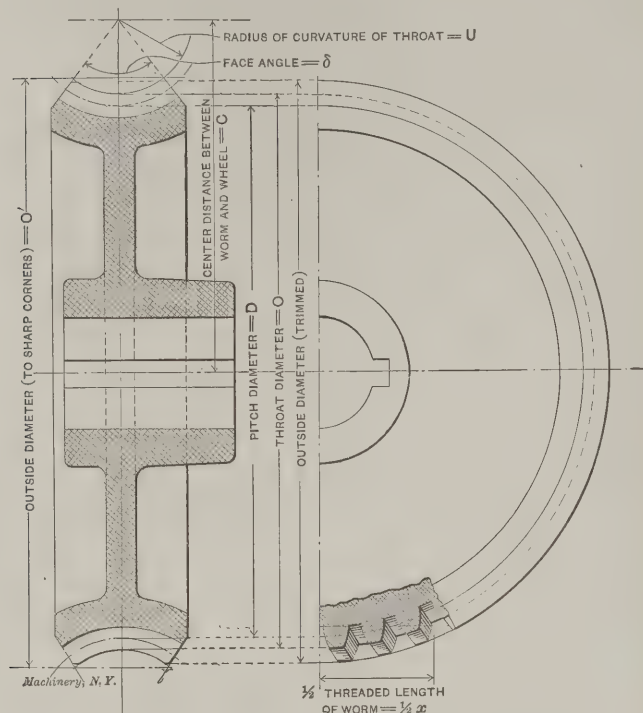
Nomenclature of Worm-Wheel Dimensions.
